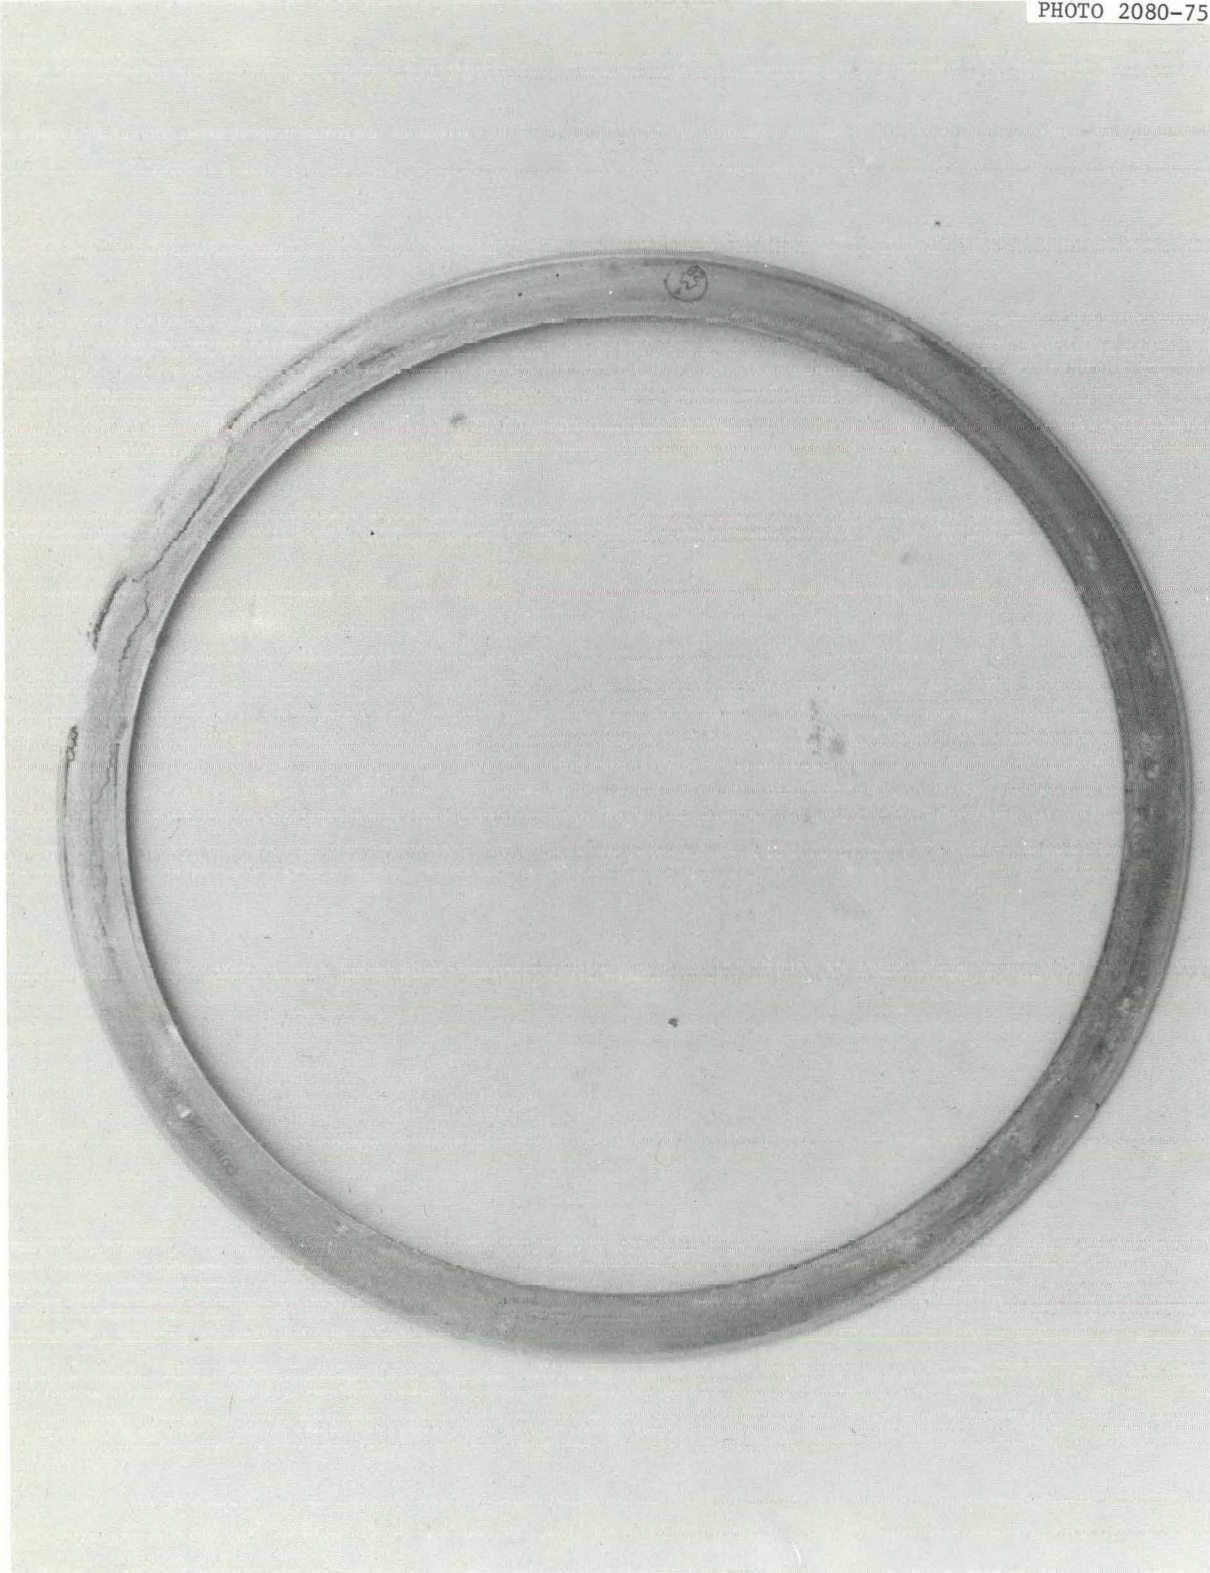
The Damaged Conoseal Gasket Removed from the HB-1 Adaptor Flange
